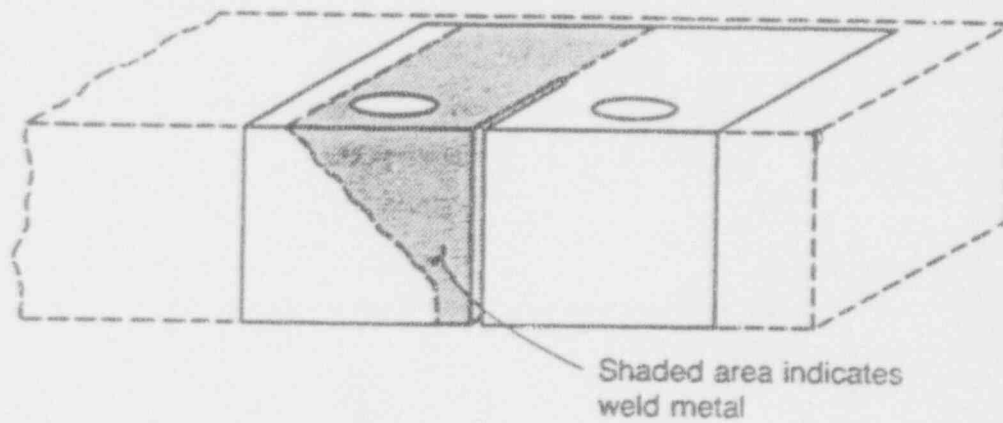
Schematic illustration of fusion-line C(T) specimen machined from a slant-vee weld
